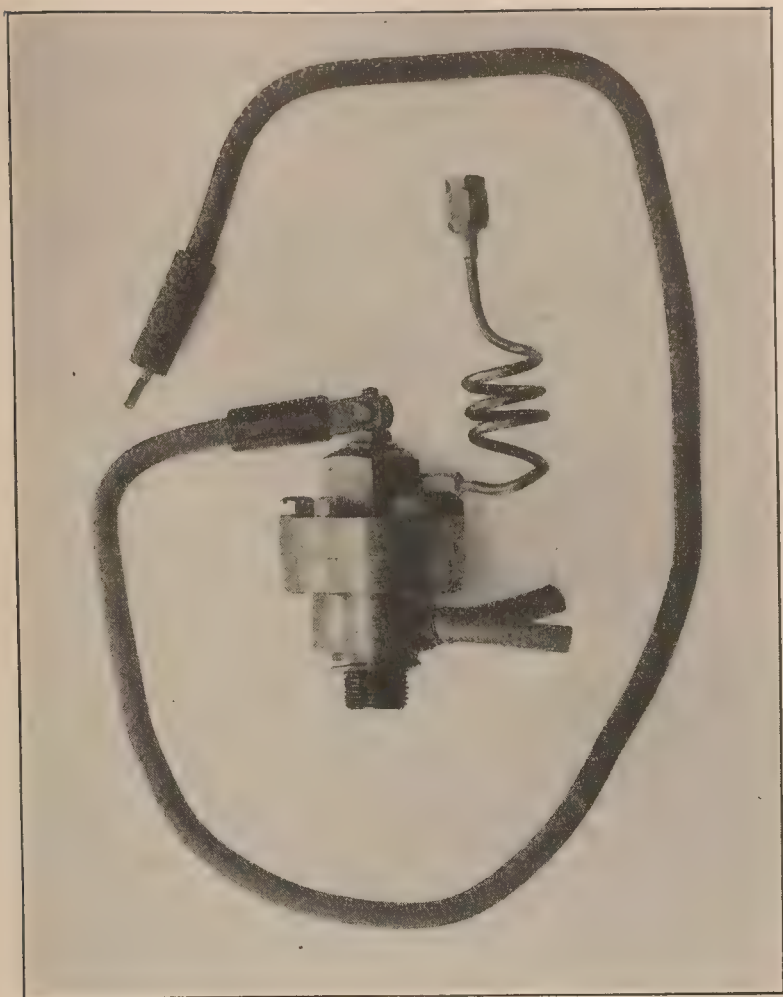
PRESSURE ELEMENT: ASSEMBLED.
